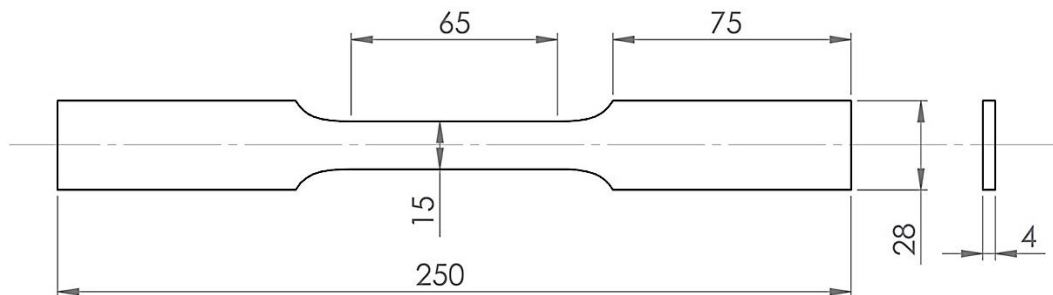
17 : Plan view of tensile specimen (measurements in mm)
